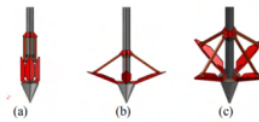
Folding Type Anchor Design, (a) Folded Anchor, (b) Interface of Opened Anchor, (c) 3D View of Opened Anchor
